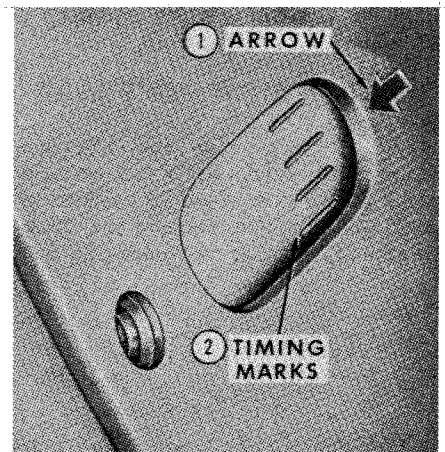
View with cover plate removed showing timing pointer on engine rear plate and timing marks on flywheel.
